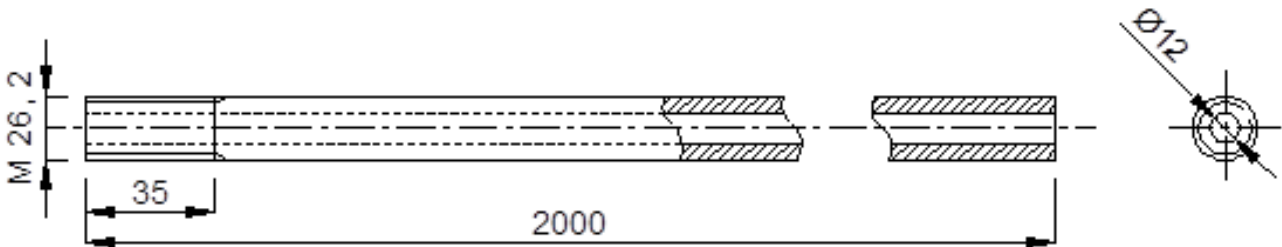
Barrel or launching tube (all dimensions in mm)
